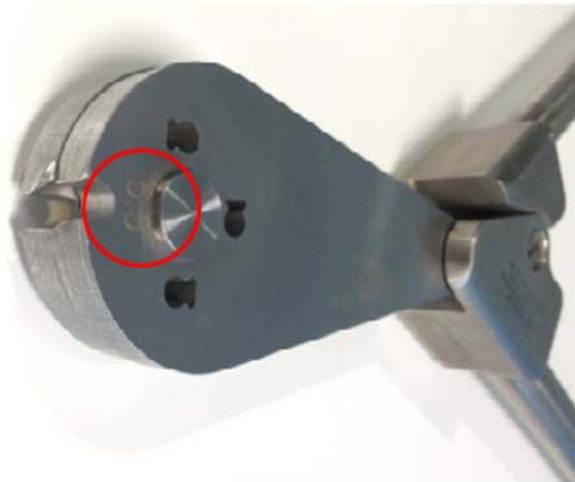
MESA Rail Cutter with damaged blade (see circled area)
